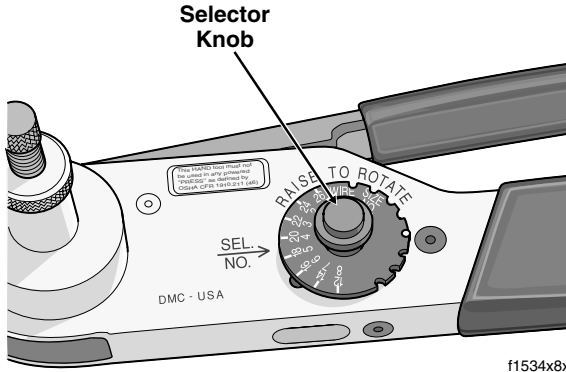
Deutsch Solid Barrel Contact Crimp Tool (Part No. HD-42879)
